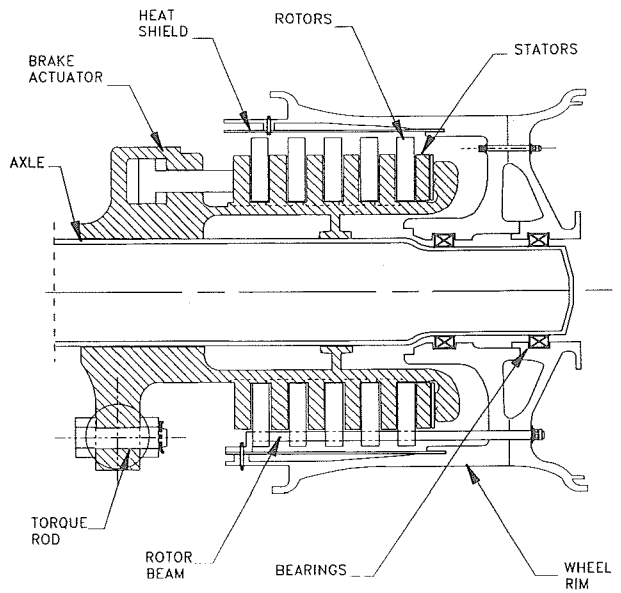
WHEEL AND BRAKE ARRANGEMENT
